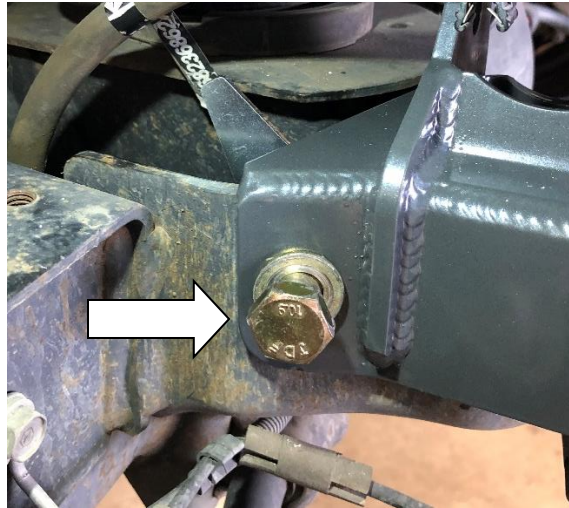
Installed Bracket with M14 Bolt and Flagnut.
